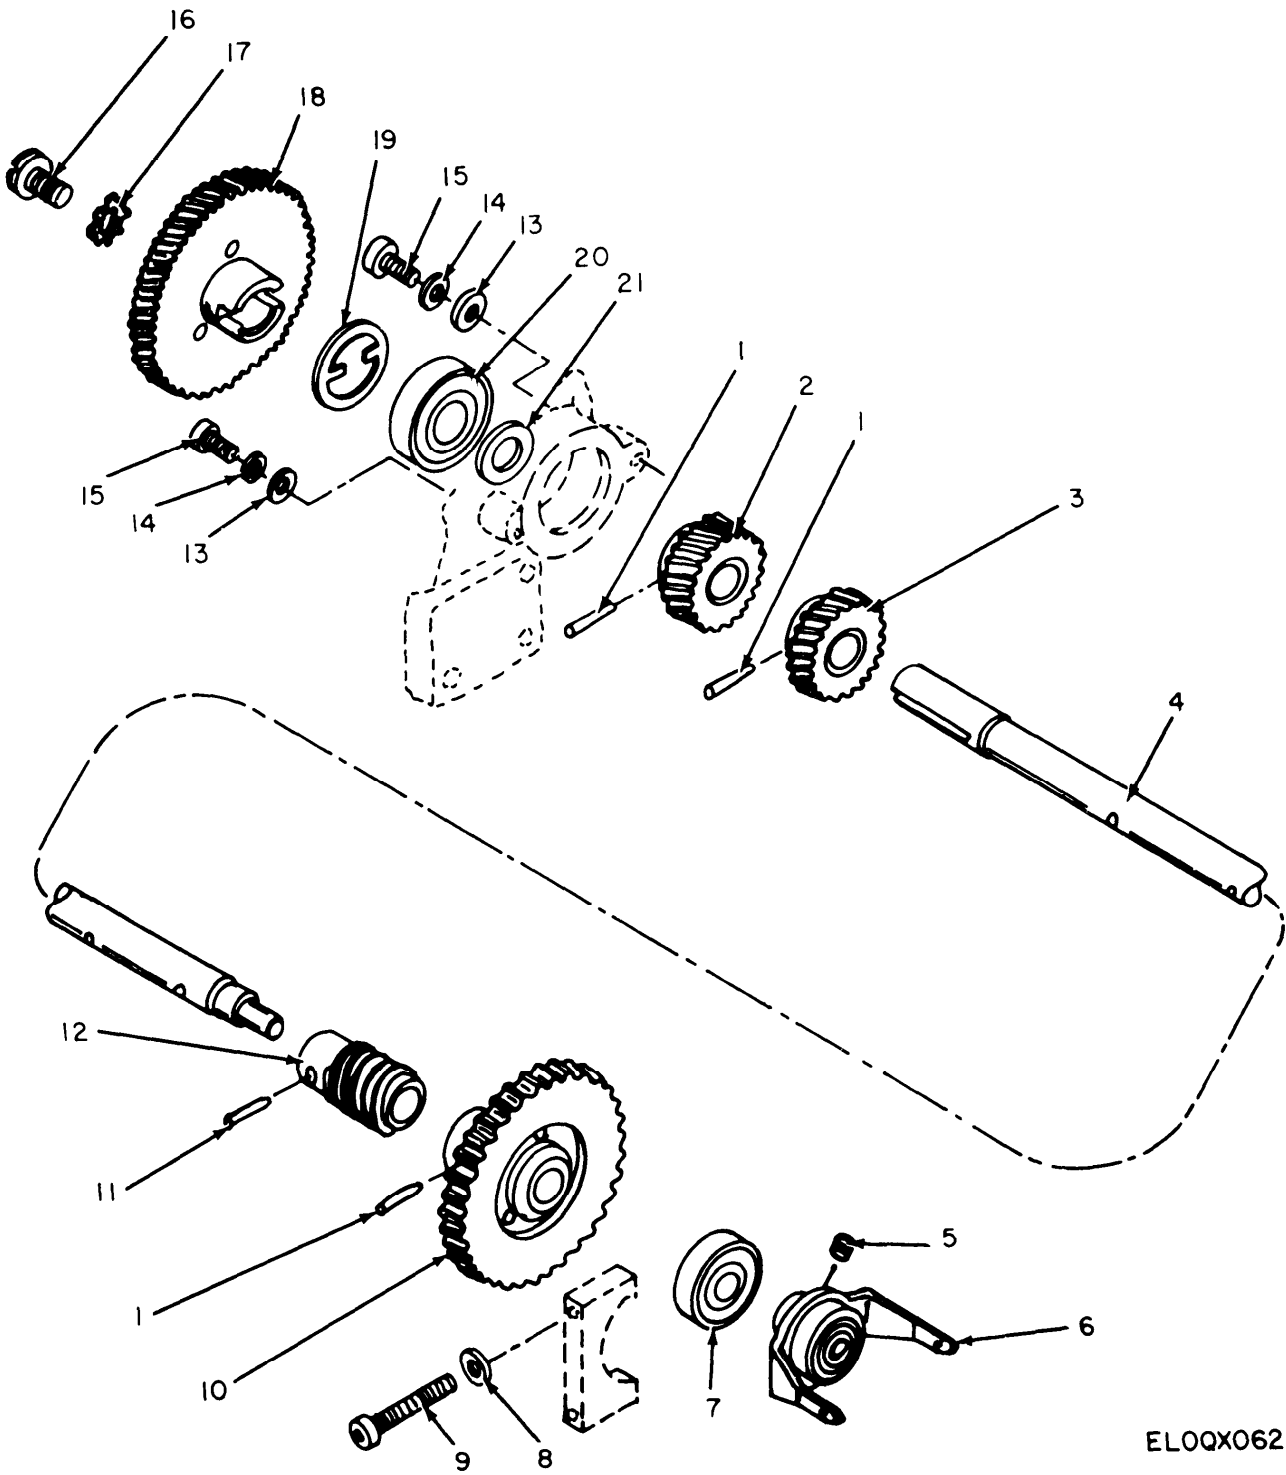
Main Shaft Assembly, Teletypewriter TT-4A/TG.
